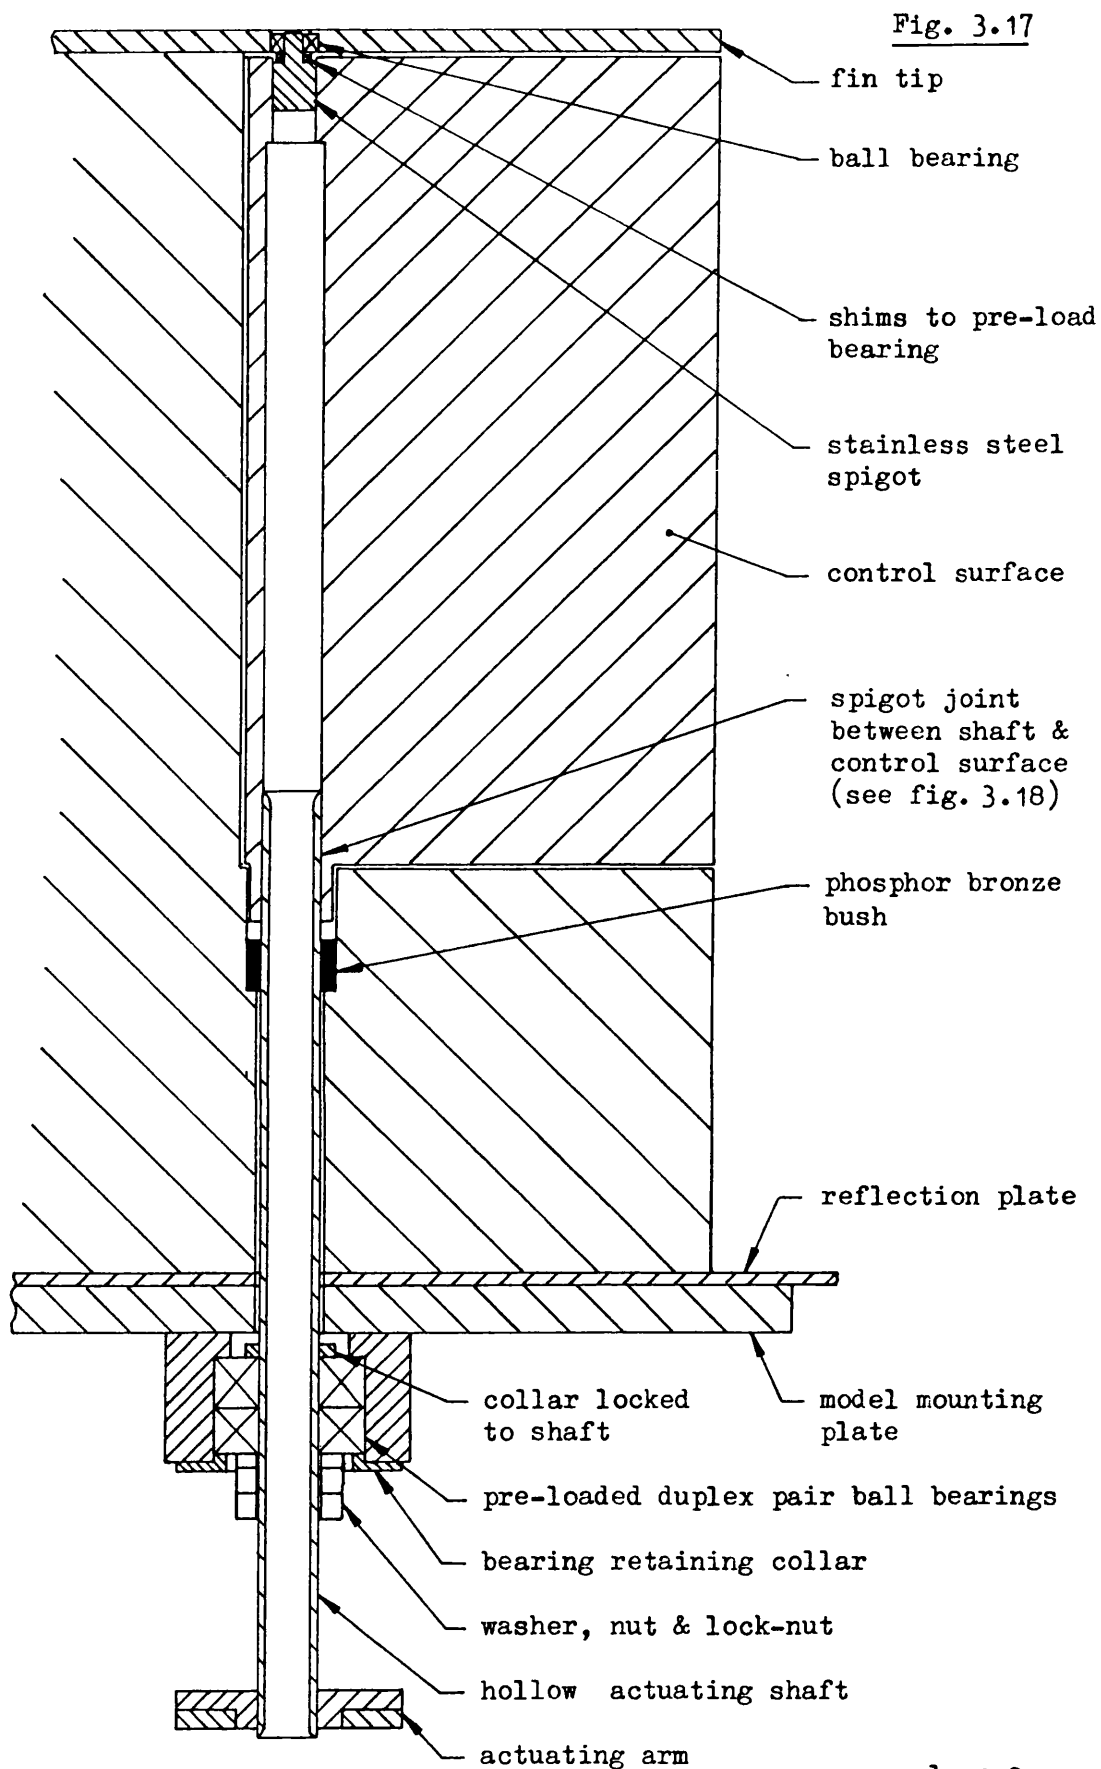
Scrap section through model fin showing arrangement of bearings for supporting the control surface and actuating shaft.
